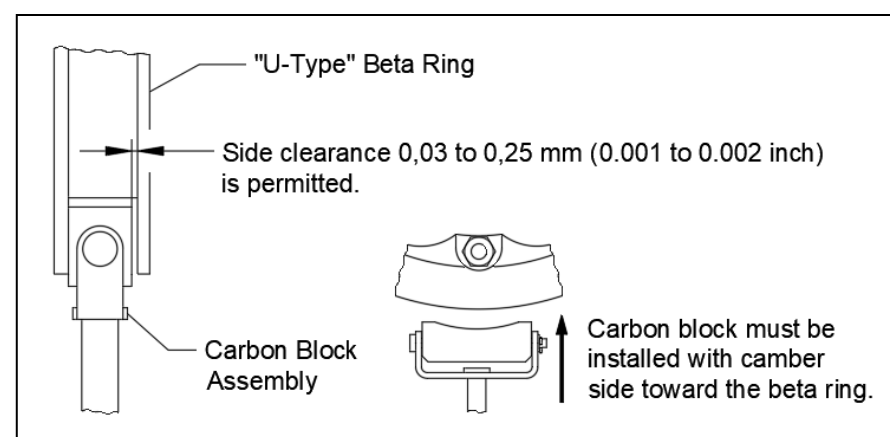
Installation of carbon block into "U-Type" beta ring
